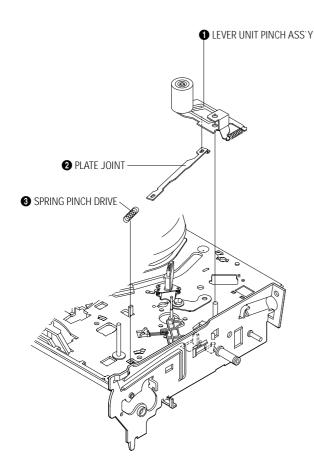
Lever Unit Pinch Ass'y, Plate Joint, Spring Pinch Drive Removal
